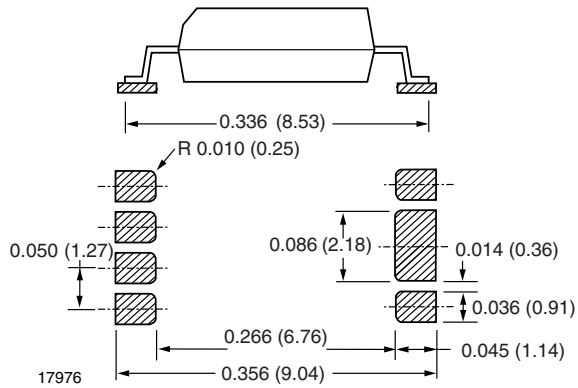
8 Pin PCMCIA, Heat Sink
